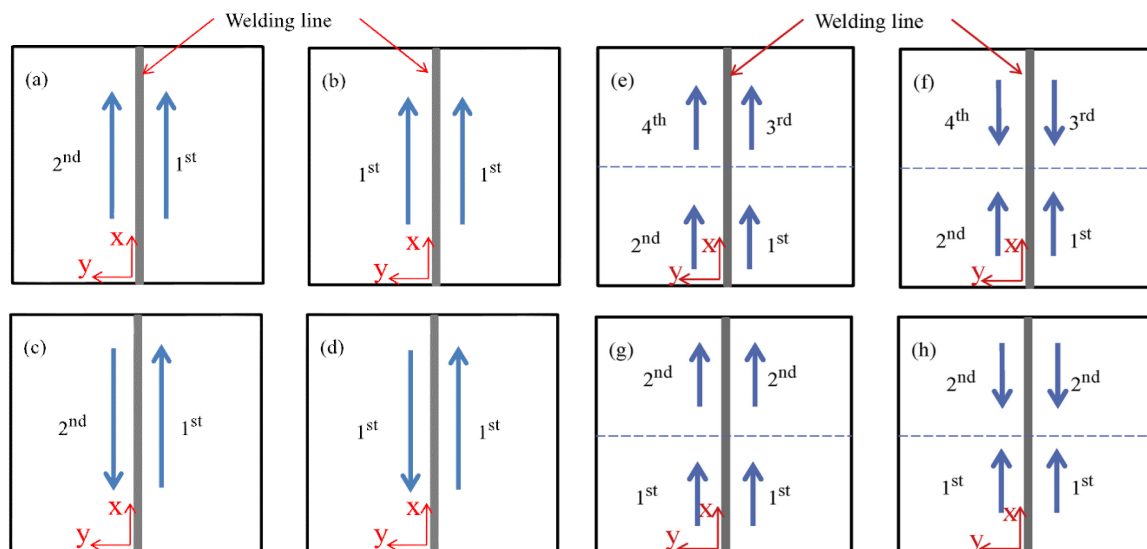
Welding sequences for progressive welding (left), welding sequences for block welding (right).
